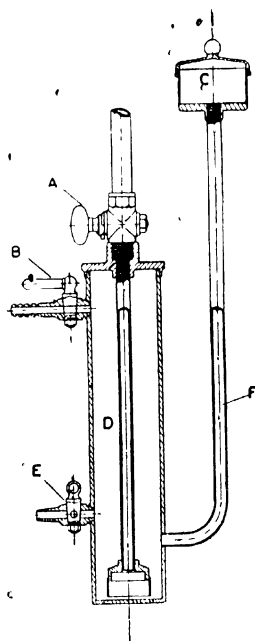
HYDRAULIC BACK PRESSURE VALVE.
